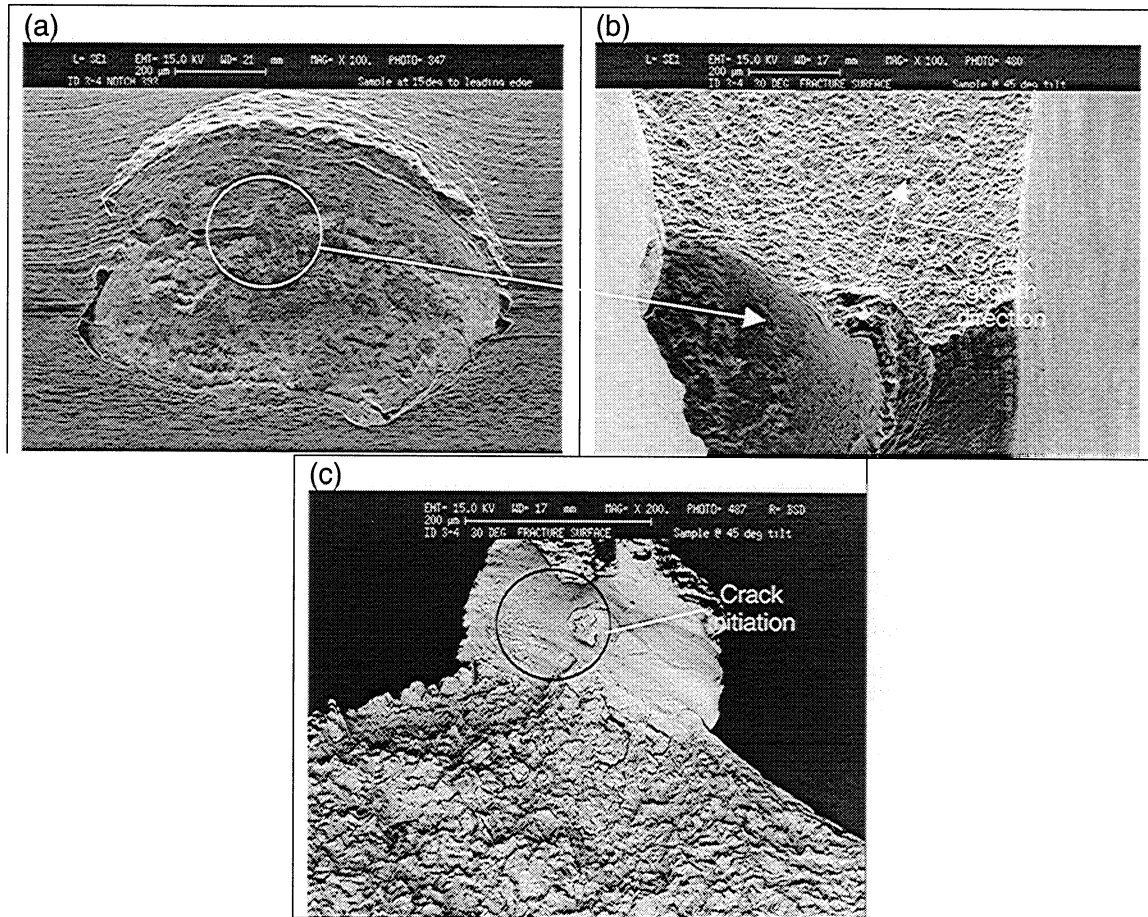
Shearing: a) Before fracture picture of sample 3-4 with a blunt LE and a 30° impact, material shear parallel to LE b) After fracture photo; c) After fracture photo behind material shear
